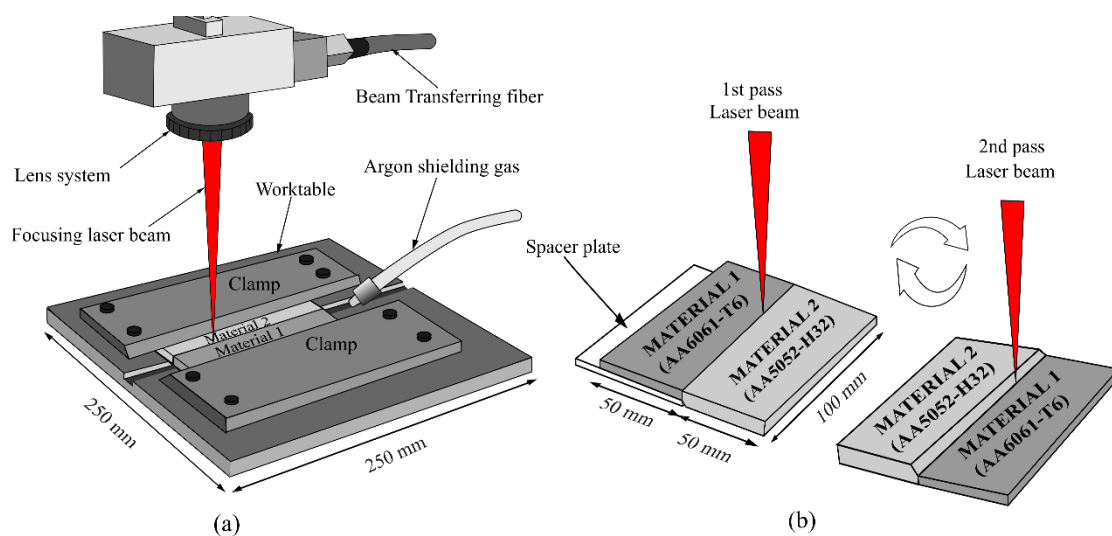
Schematic of the double-sided butt weld for welding of aluminium specimen pair showing a) apparatus set-up, and b) successive double-sided welding
